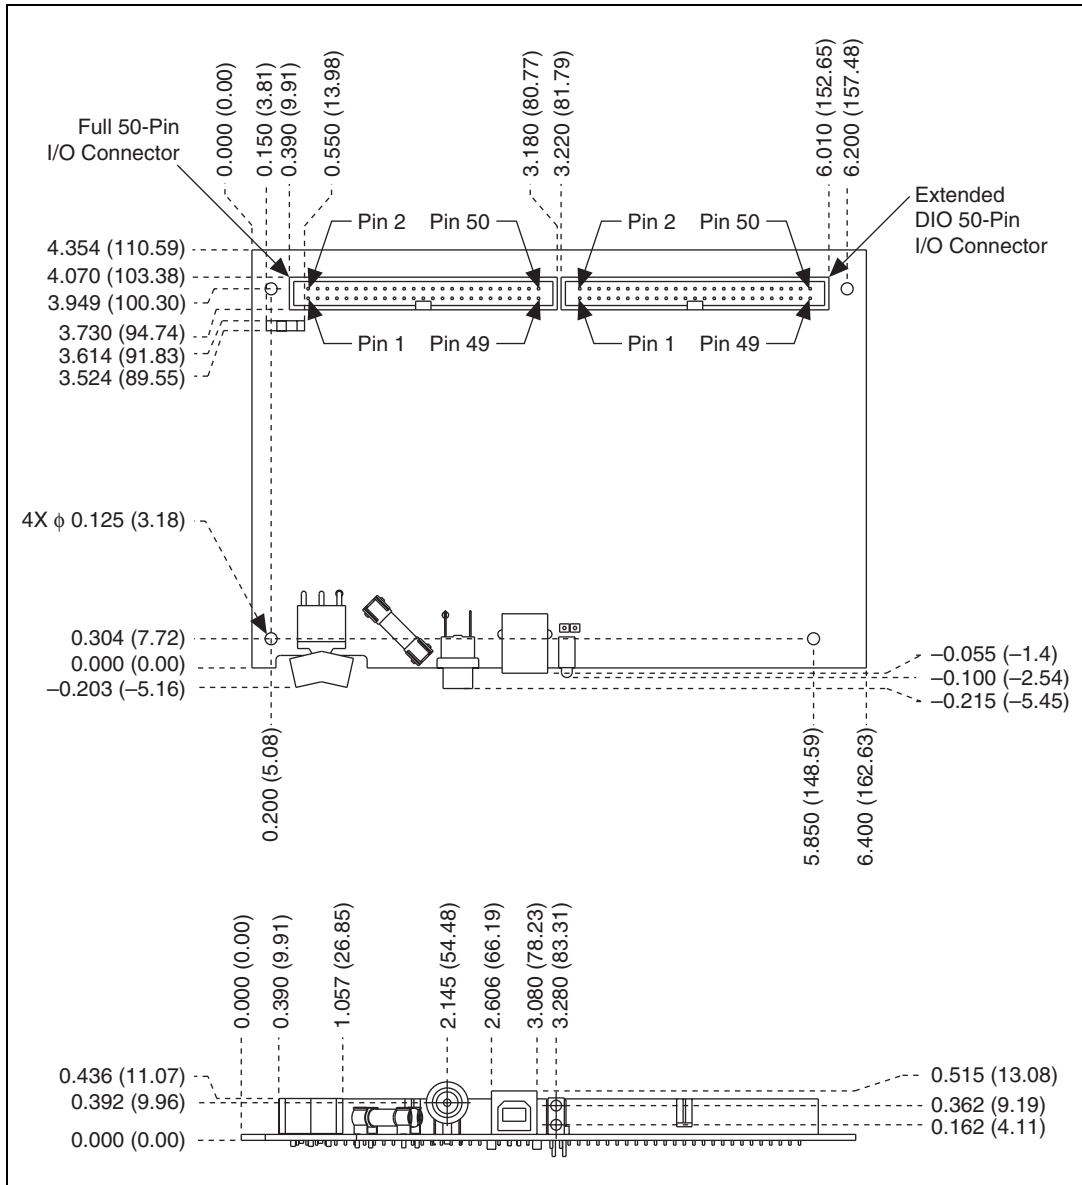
DAQPad-6016 OEM Dimensions in Inches and Millimeters (111 mm × 163 mm Version)
